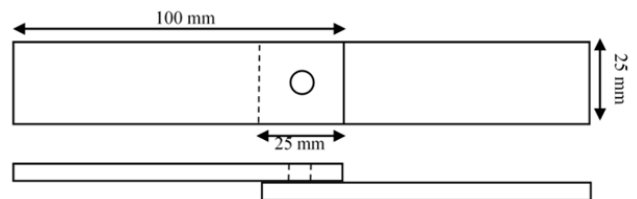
Dimensions of the overlap specimen that to be welded
